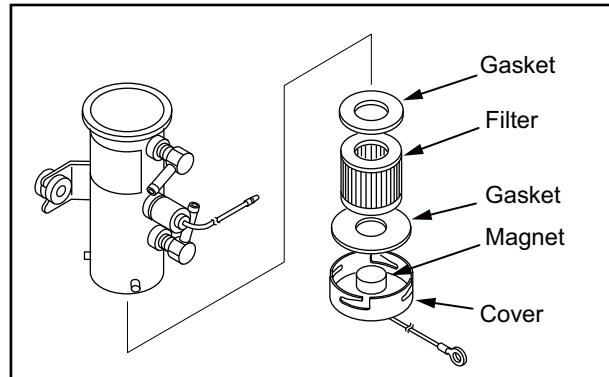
Solenoid fuel pump filter - Inspect and clean
